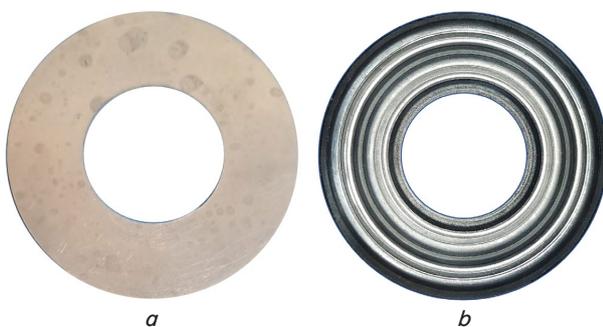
Corrugated metal gasket: *a* – blank material; *b* – corrugated metal gaskets after forming
